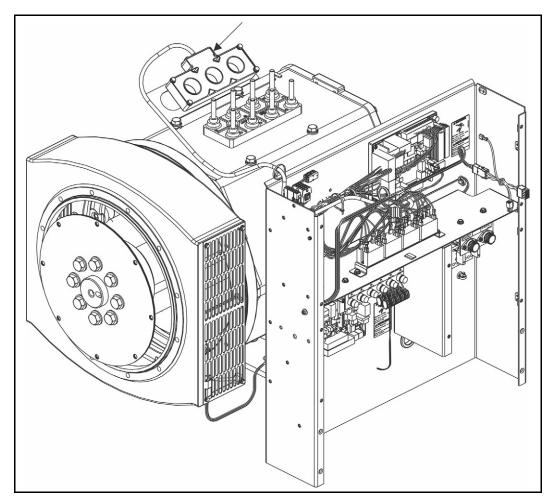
CURRENT TRANSFORMER ASSEMBLY
